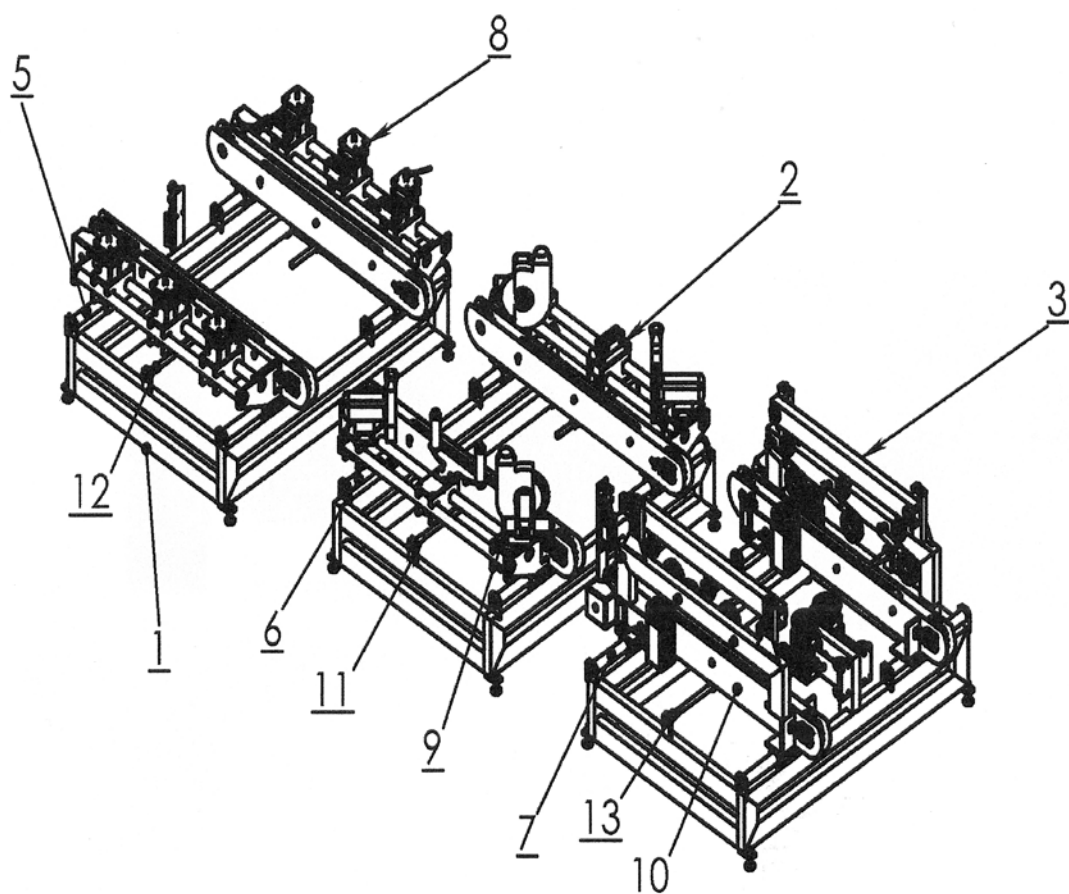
General view of automatic processing line for wooden pallets: 1 - marking machine pallets; 2 - machine to cut corners pallets; 3 - machine for milling Lisok lower pallet boards; 5, 6, 7 - directing regulatory system pallet width and length; 8, 9, 10 - the system moving circular saw and milling calipers; 11 12 13 - adjusting screws; 14 - pneumatic cylinders.
